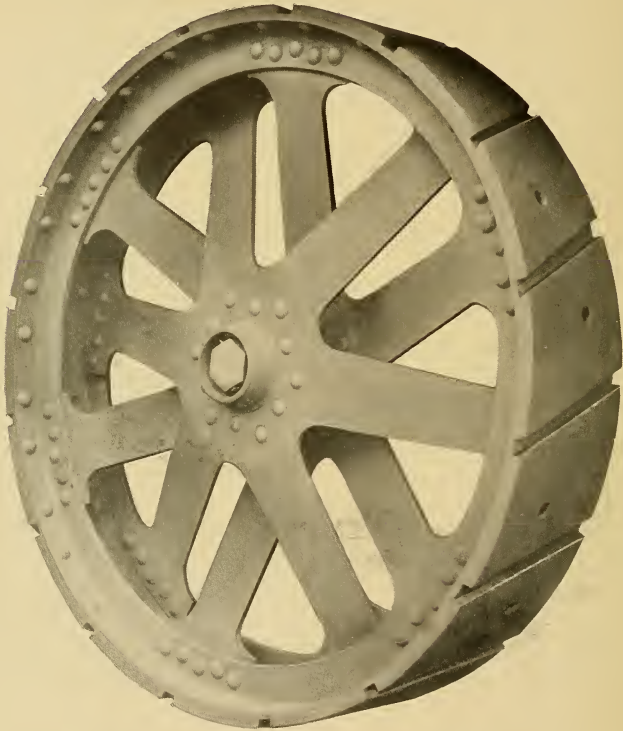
DOUBLE PLATE INTERLACED SPOKE WHEEL MADE BY THE THORNYCROFT STEAM WAGGON CO., LTD., BASINGSTOKE
